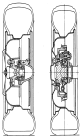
Two vertical cross-sectional views of a multi-chambered mechanical device. The left view shows a central assembly with a complex internal structure, including a central shaft and various components. The right view shows a similar assembly but with a different internal configuration, possibly a different stage or a different component. Both views show a central vertical axis and a symmetrical design.
